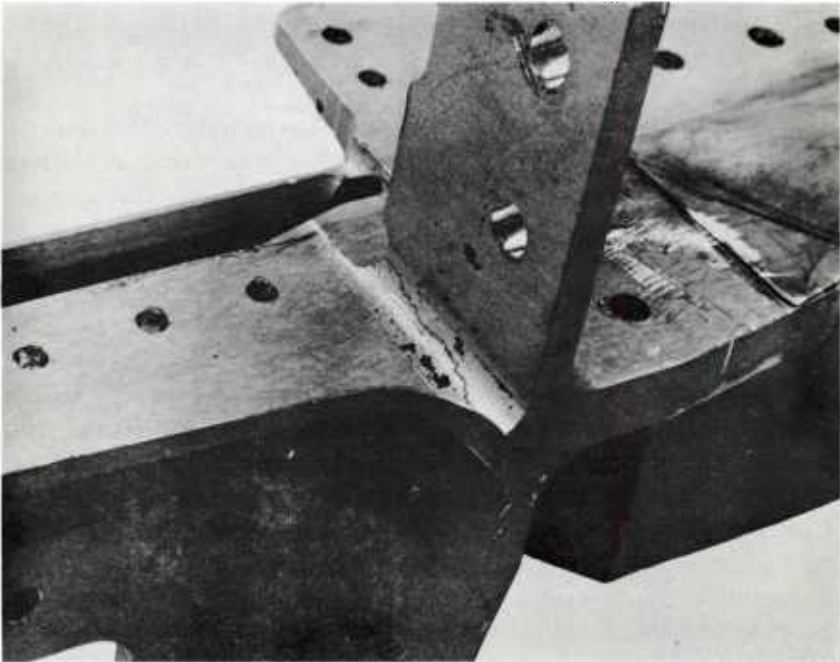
Stress-corrosion fatigue crack in longeron fitting.
